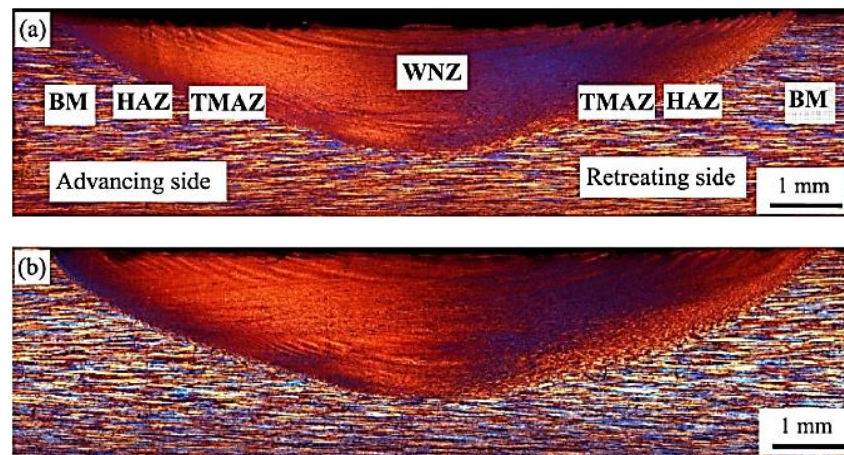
Optical microscopy of various welded joint zones observed in (a) FSW and (b) SFSW [29]
